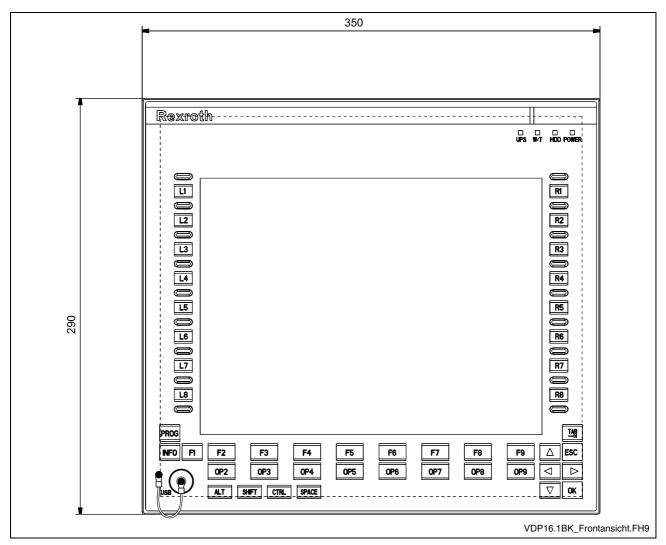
Dimensions – Front panel VDP 16.1BK
